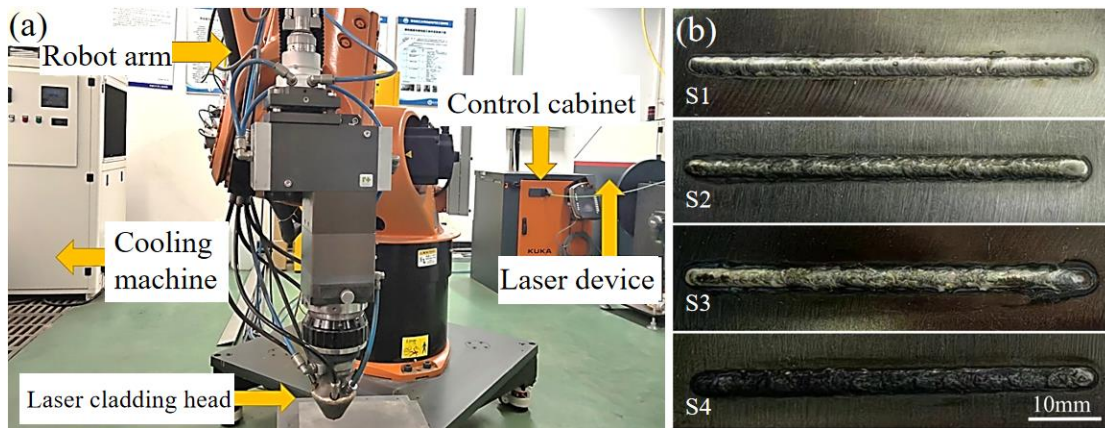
(a) Laser cladding equipment; (b) Laser cladding coating sample
